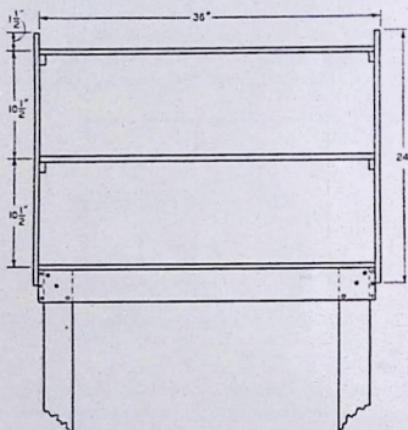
Sketch showing dimensions of operating table and method of assembly.
